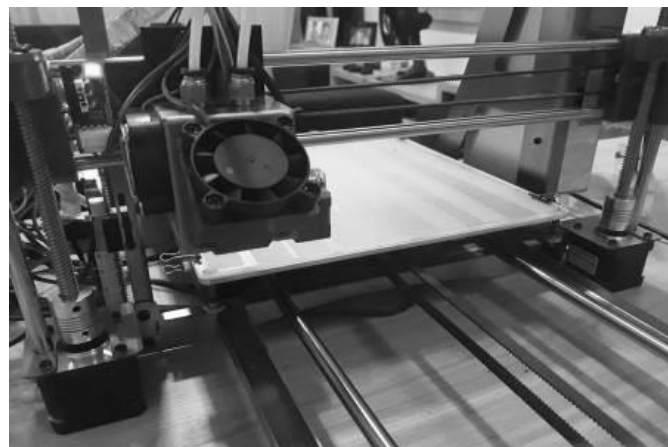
3D Zonestar Diy 802QR2 printer with the technique of Deposition Fusion Modeling.
